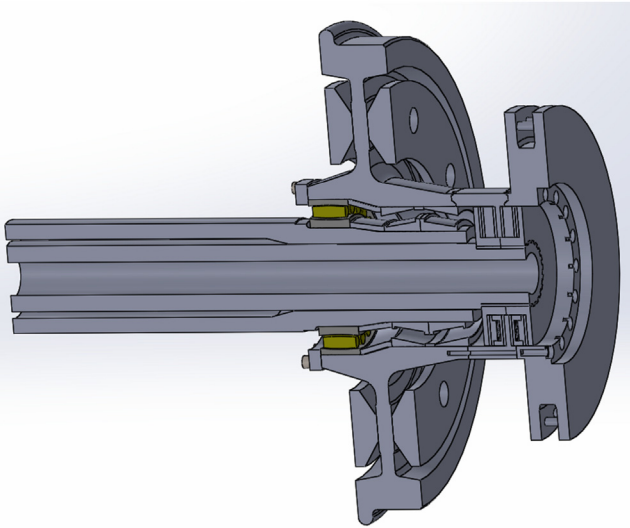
Three-dimensional view of the AIR wheelset equipped with torque limiter and an optional external brake disc.
